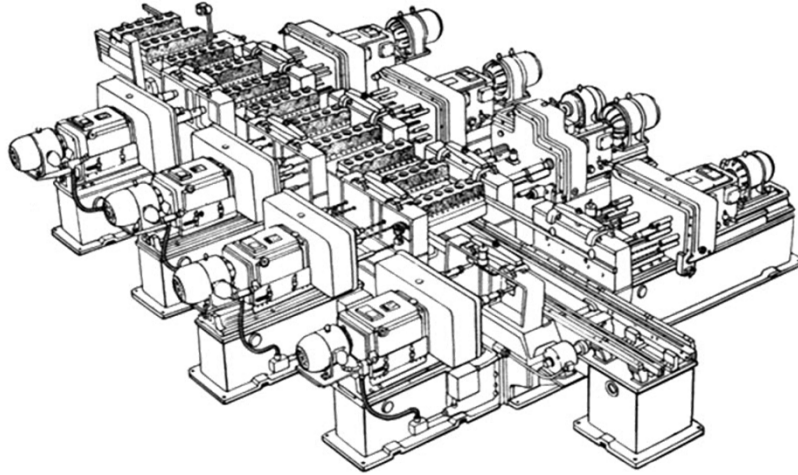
Unit-type multiple-spindle drilling machine.
